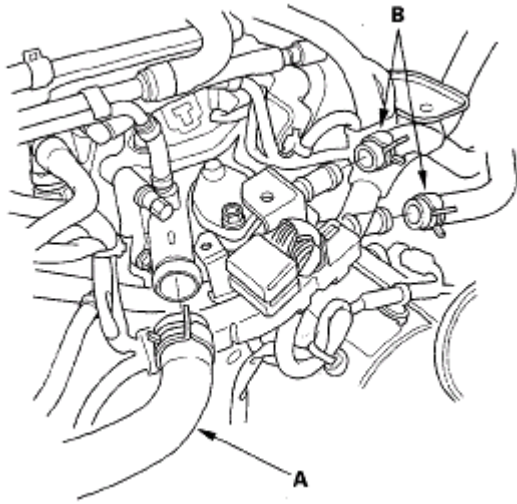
Identifying Upper Radiator Hose And Heater Hoses
